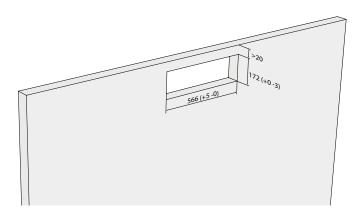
Hole pattern with cut-out dimensions when the product has been supplemented with a leakage indicator.
